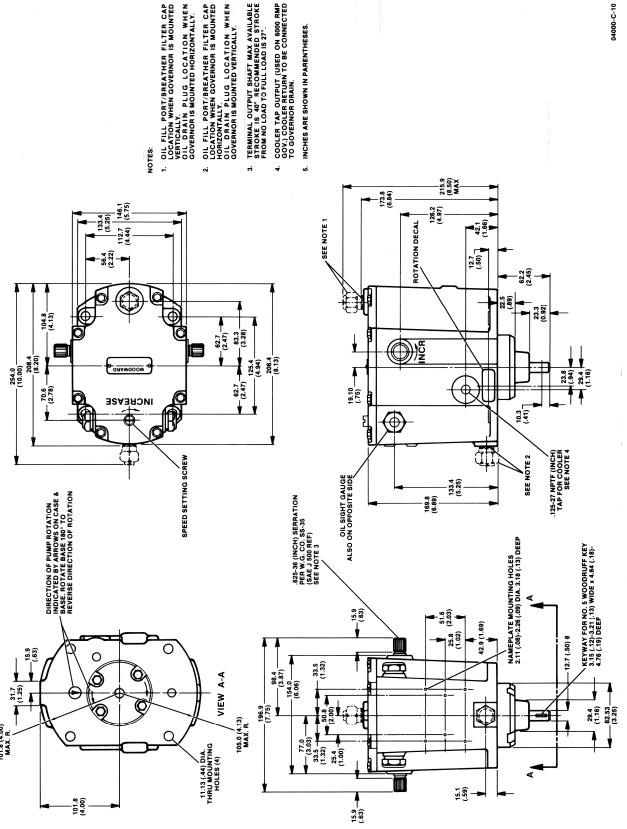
TG-13/TG-17 Outline Drawing Screw Speed Setting. Die-Cast Aluminum Case. Do Not Use For Construction
